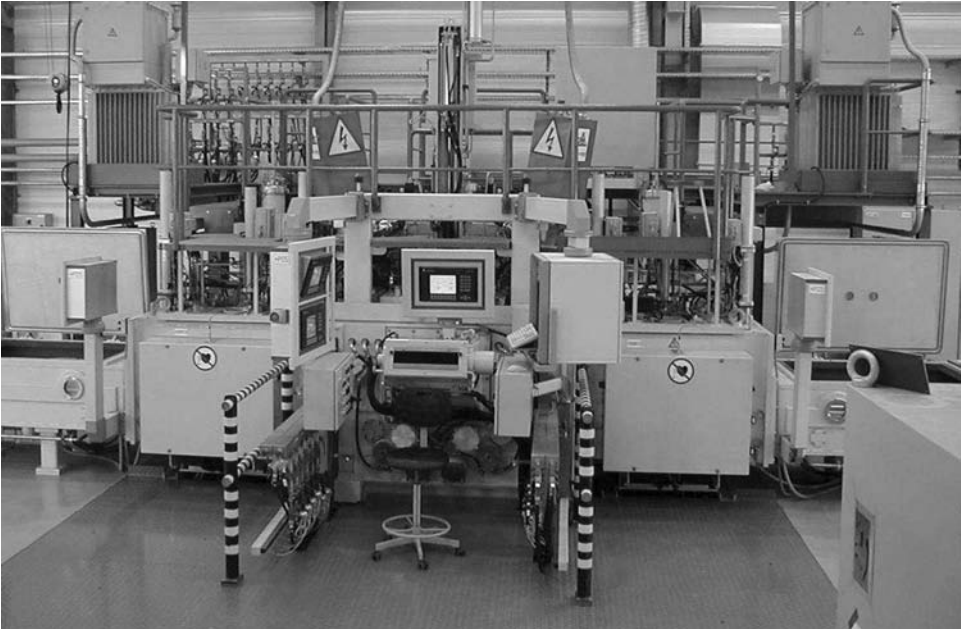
Industrial-scale electron beam physical vapour deposition (EB-PVD) unit for the deposition of ceramic coatings on gas turbine components. (Courtesy of Matt Mede, ALD Vacuum Technologies.)
